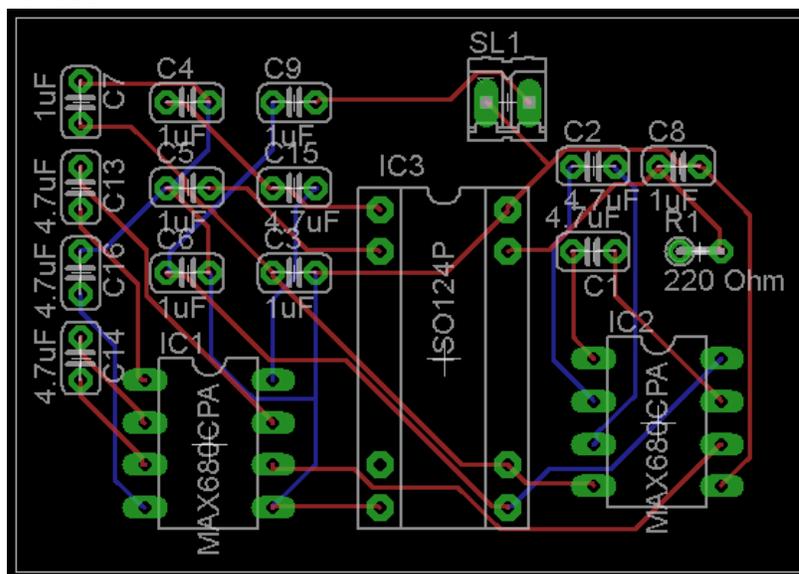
SAE Isolation circuit designed using EagleCAD PCB
